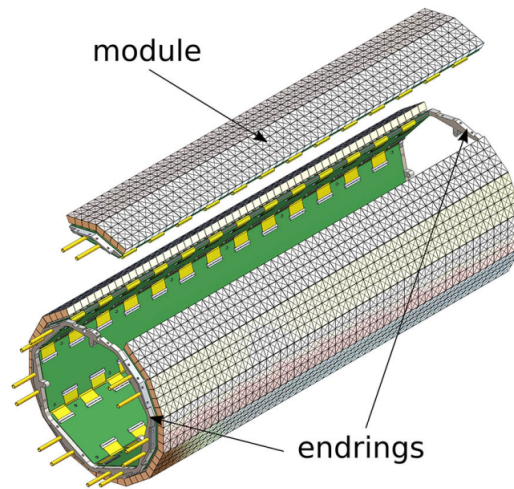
CAD drawing of the tile detector. Drawing taken from Ref. [118].
